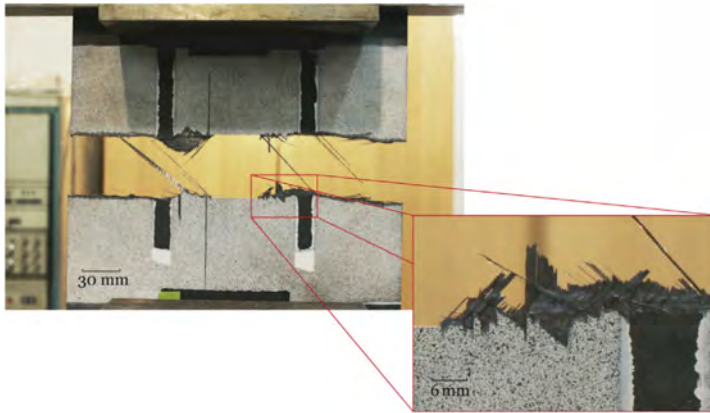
Fracture center-notched thin-ply NCF plate after testing [42].
